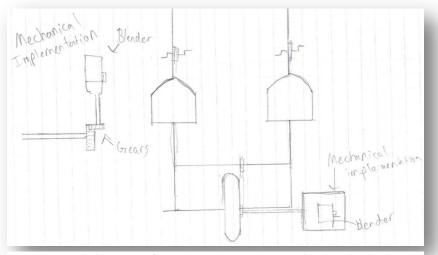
Labeled Drawing of a mechanical recumbent tandem bicycle blender (photo by Adam Clark).
